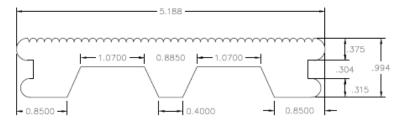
Rustic™ Deck Board - Grooved Cross Section Profile 2
